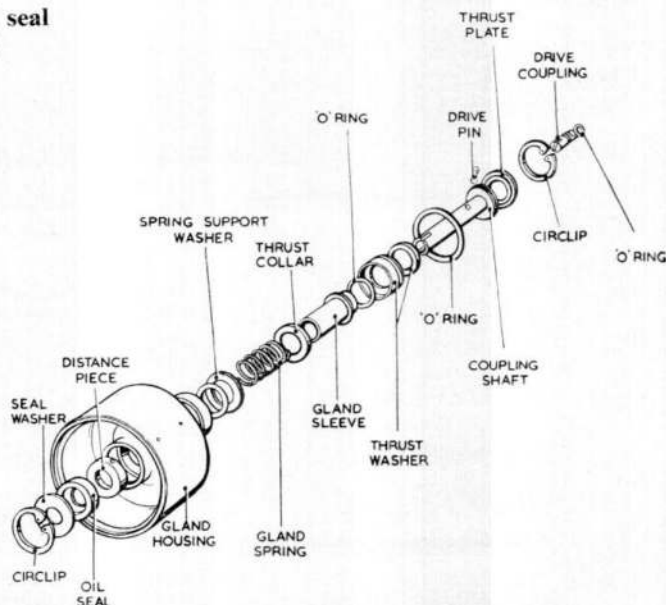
Exploded view of Duplex Type gland seal (Marks 23, 26, 27, 29, 30, 34 and 35)
